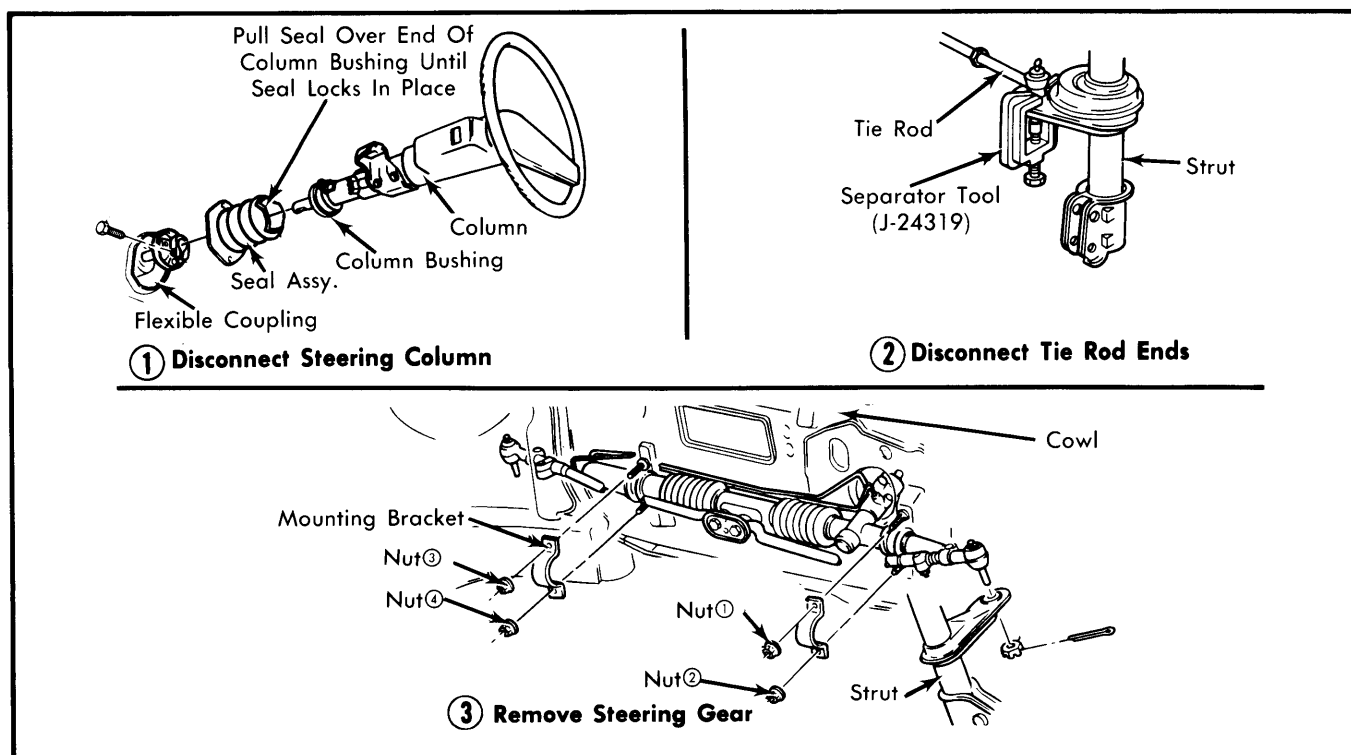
Steering Gear Removal & Installation Procedure. Reinstall Mounting Bracket Nuts In Order Shown.
